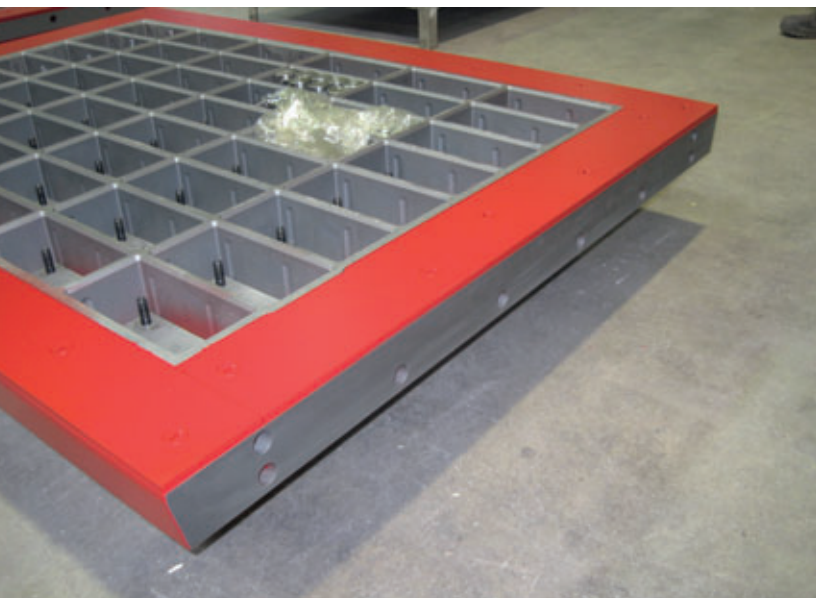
Delivery condition of the »Moduline2« mould bottom with self-assembly of the bolted flanges by the customer
